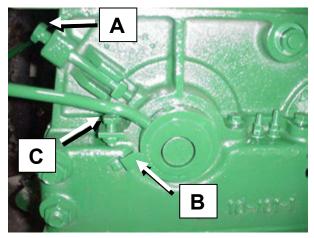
Rollermill Housing Eccentric Bearing. A - Eccentric Lock Bolts, B - Pointer Gauge, C - Stop Bolts.
